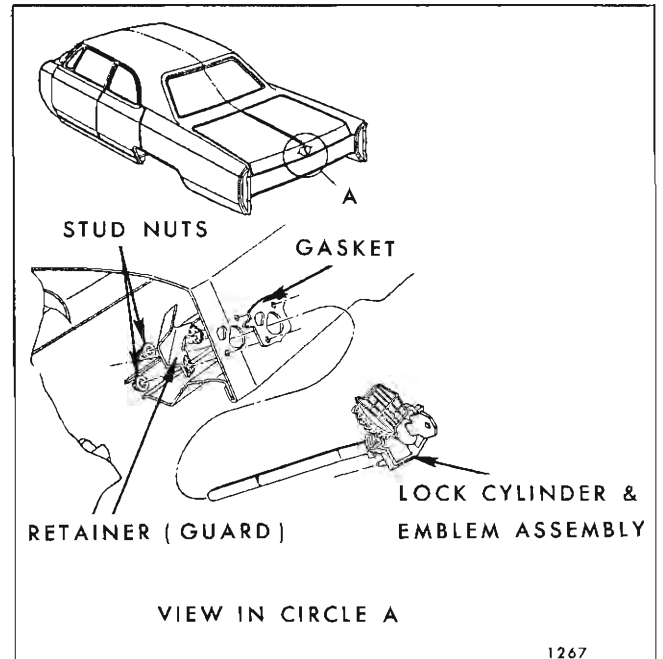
F9—Rear Compartment Lid Lock and Emblem Assembly
